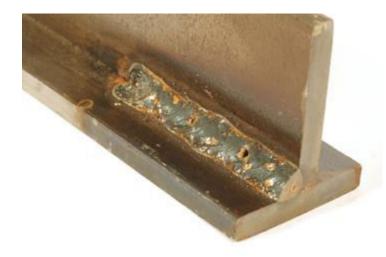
No Shielding Gas on Steel - A lack of or inadequate shielding gas is easily identified by the porosity and (pinholes) in the face and interior of the weld.
